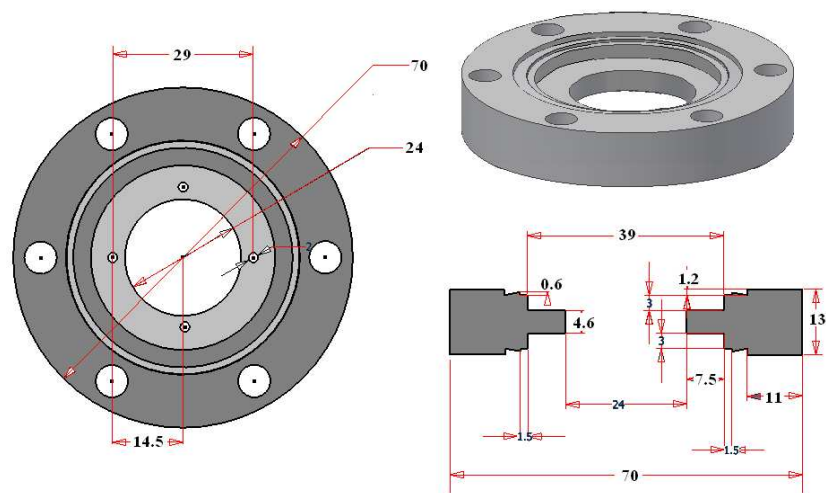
Inventor 11.0 technical drawings for the DN40 CF flange support. This component was made of stainless-steel. All dimensions in millimeters.
